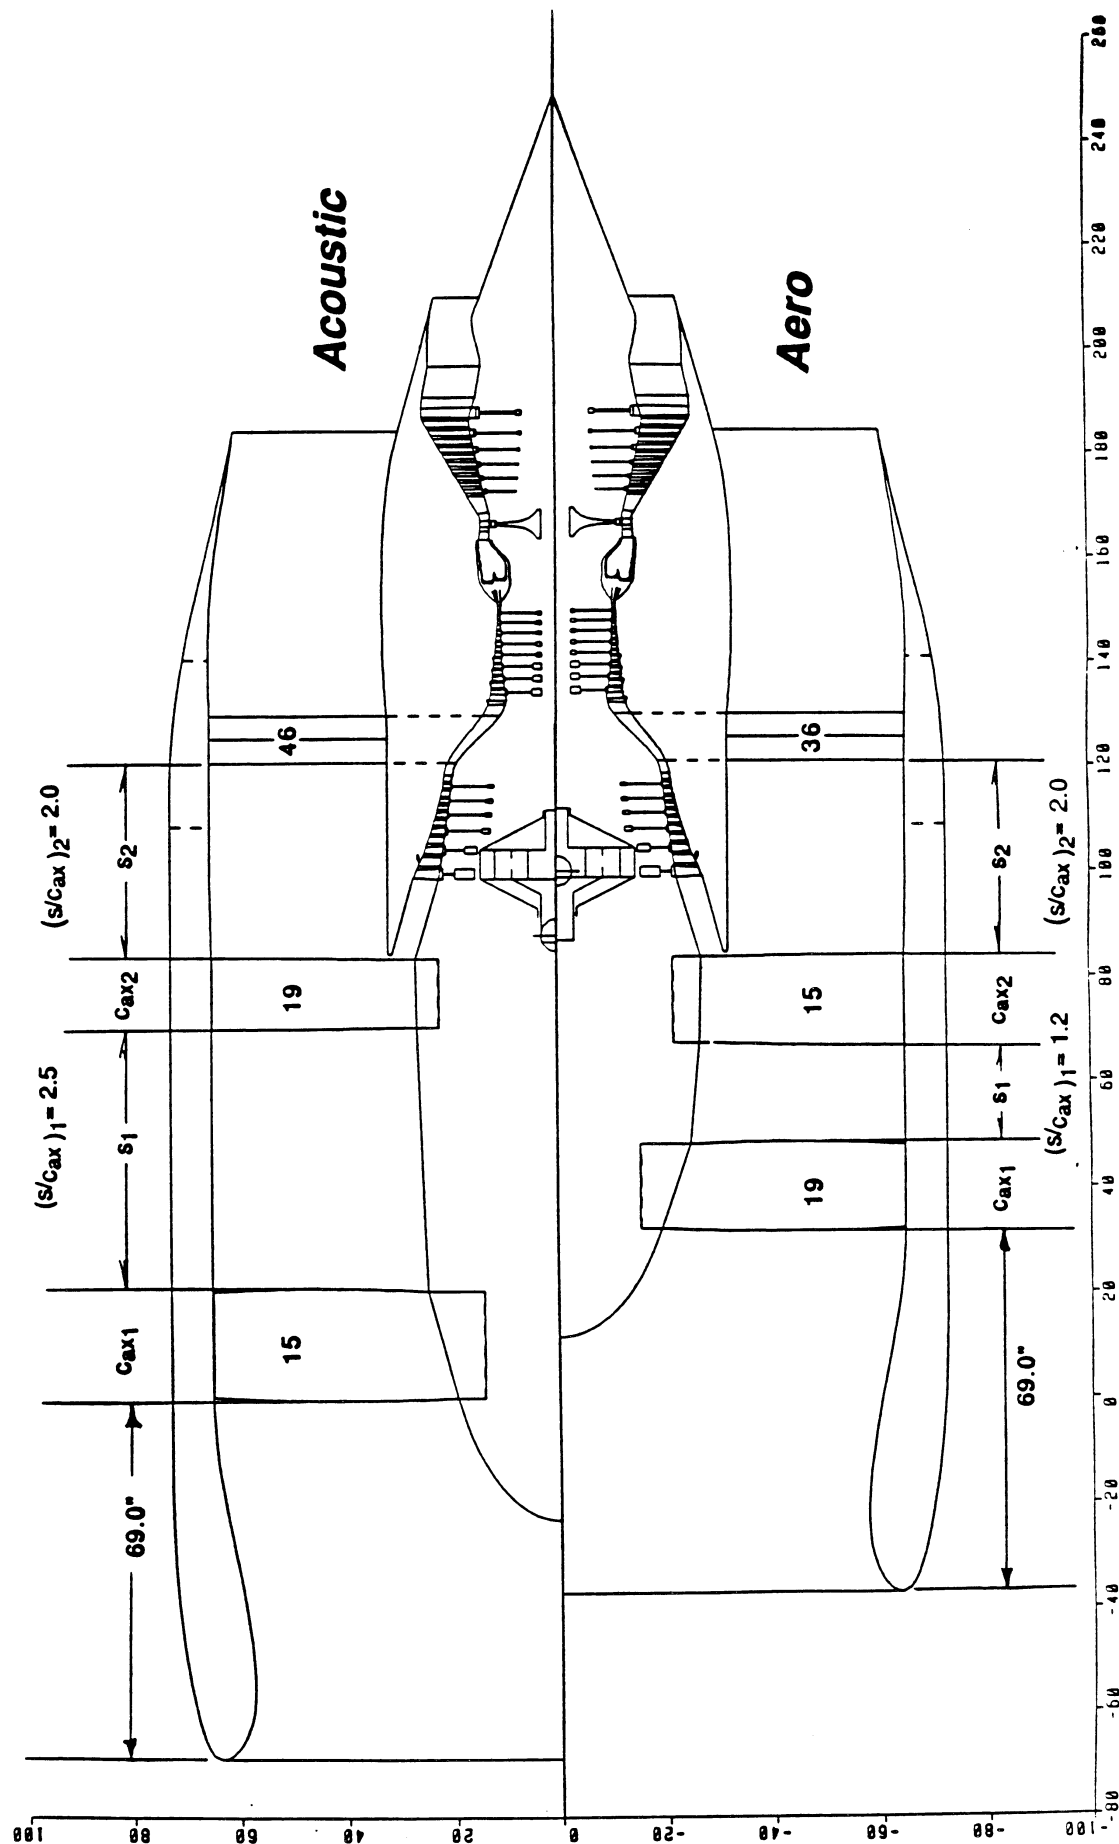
Geared Counter-rotating Fan Engines 5D and 5B Cross-sections
